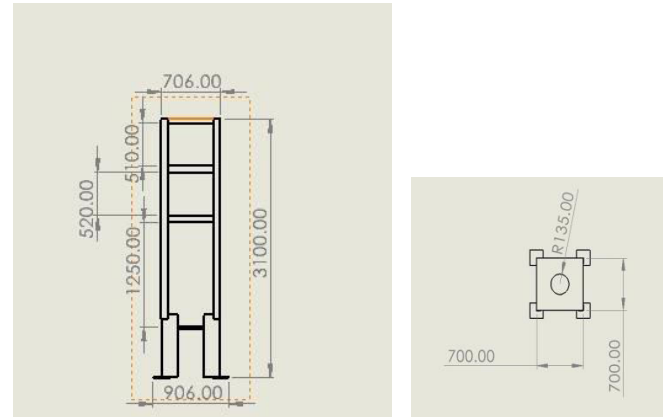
Drafting of the New Structural Design (dimensions in mm)
